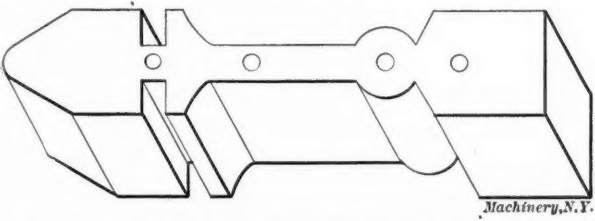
A Die in which the Outer Edges are used for Shearing the Metal when Blanking
